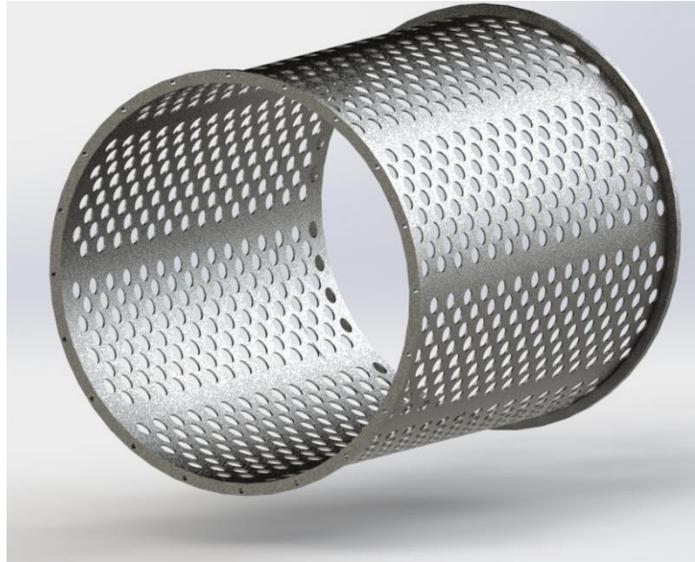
Inner cylinder of the Tilted Tumbler showing the perforations.
